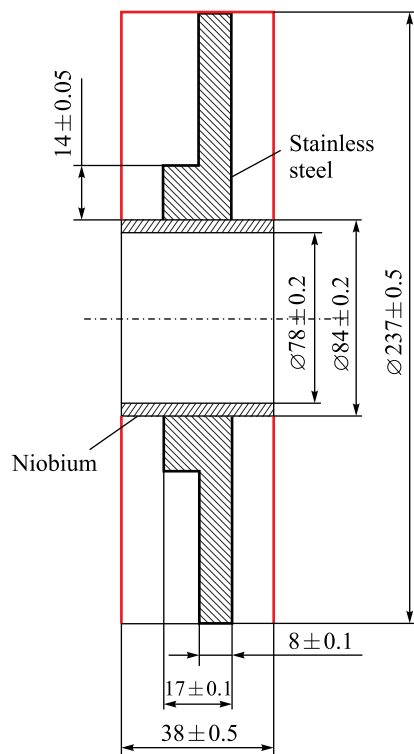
Scheme of adapter manufacturing by means of explosion welding of niobium with stainless steel
